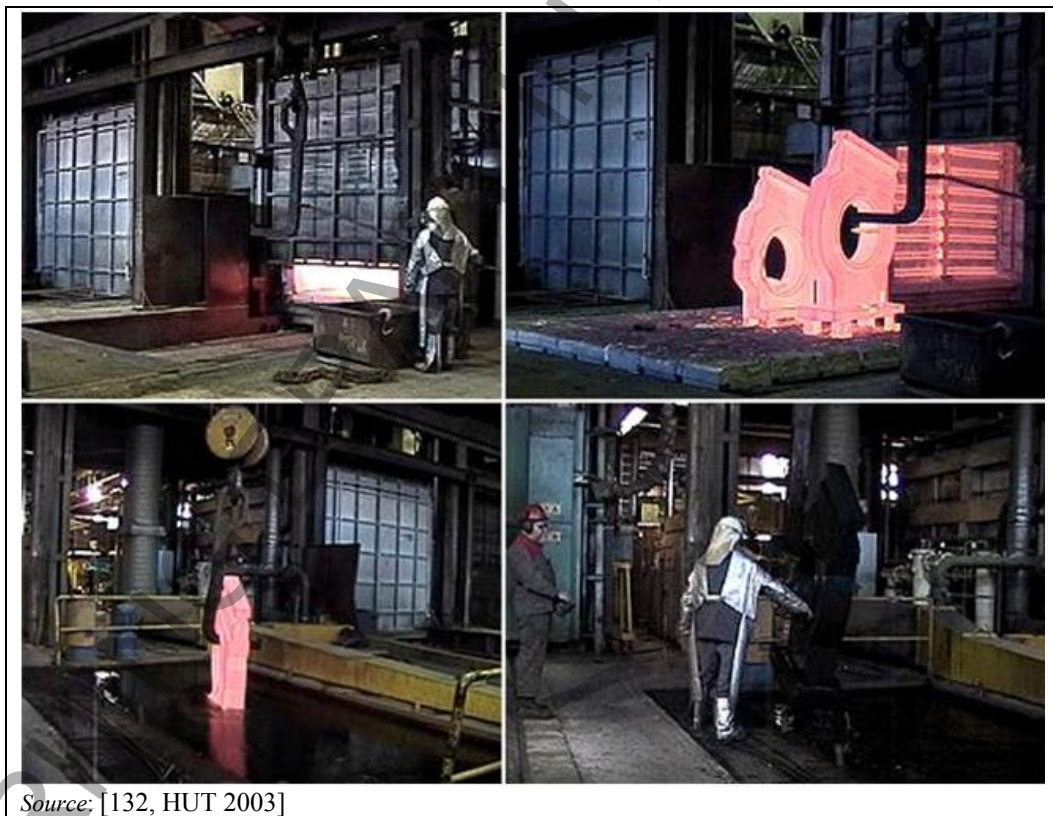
Quenching of a hot casting shortly after heat treatment
